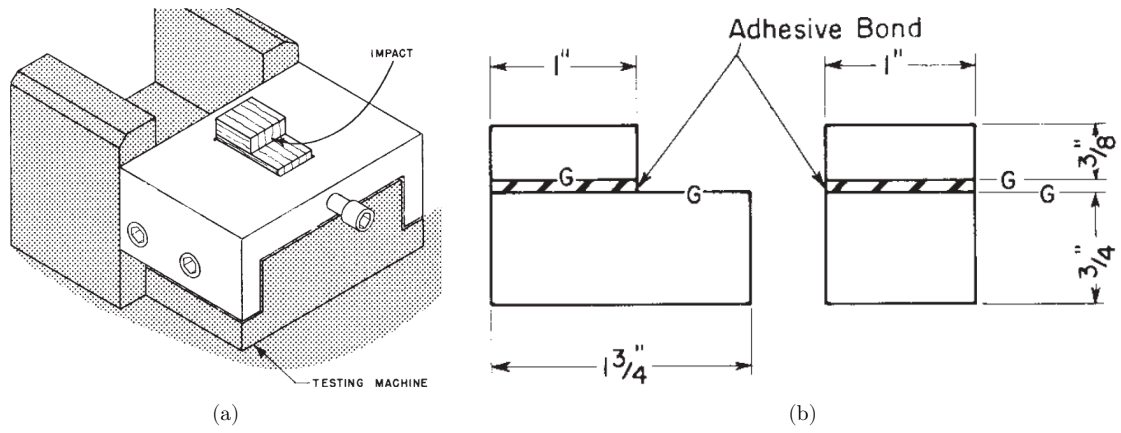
Description of the ASTM D950-03 Test [6]. (a) Adapter jig for impact machines. (b) Block shear impact test specimens.
